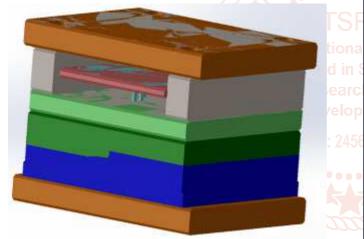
3D View Assembly for Pressure Die Casting of Door Handle
